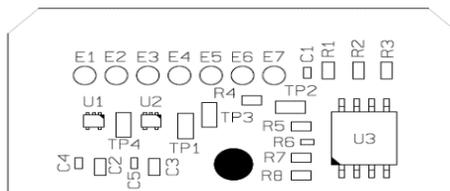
Configuration Module Circuit Card Assembly (Primary Side)
